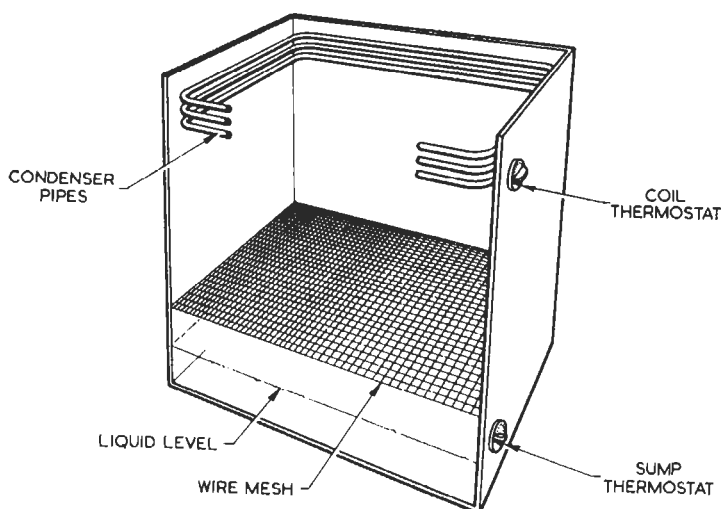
Cut-away drawing of vapour degreasing plant
